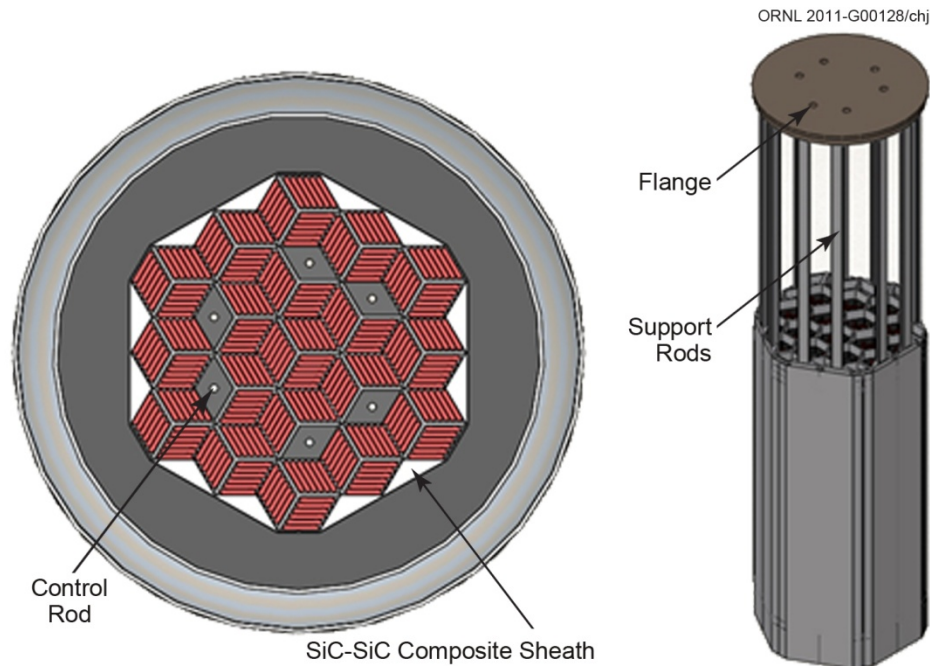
Plank-fuel-assembly core cross section and removable core subassembly.
